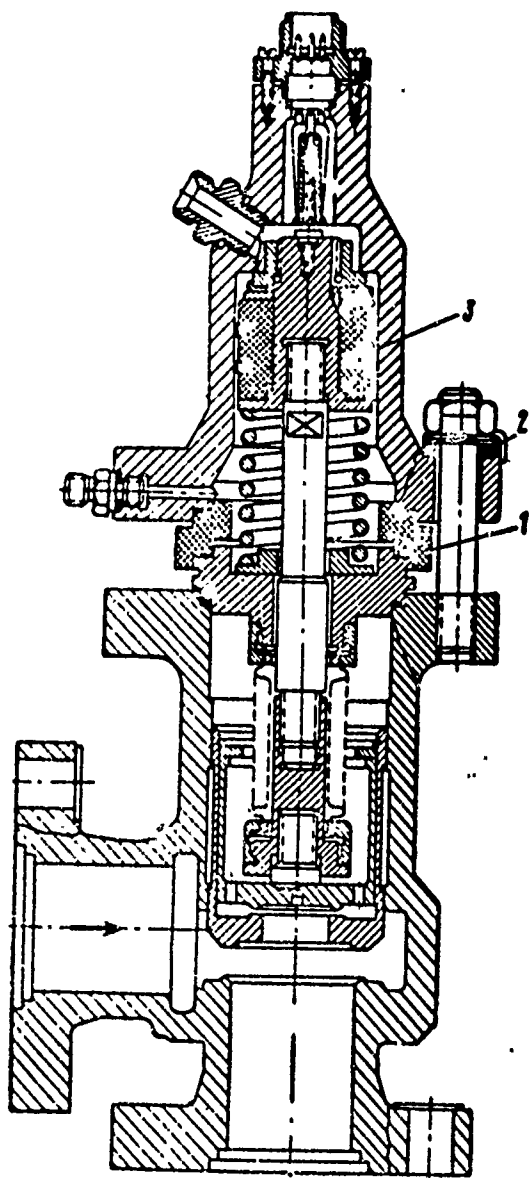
A normally open valve designed for handling low-boiling liquids; 1 - adapter; 2 - ring; 3 - bushing.
